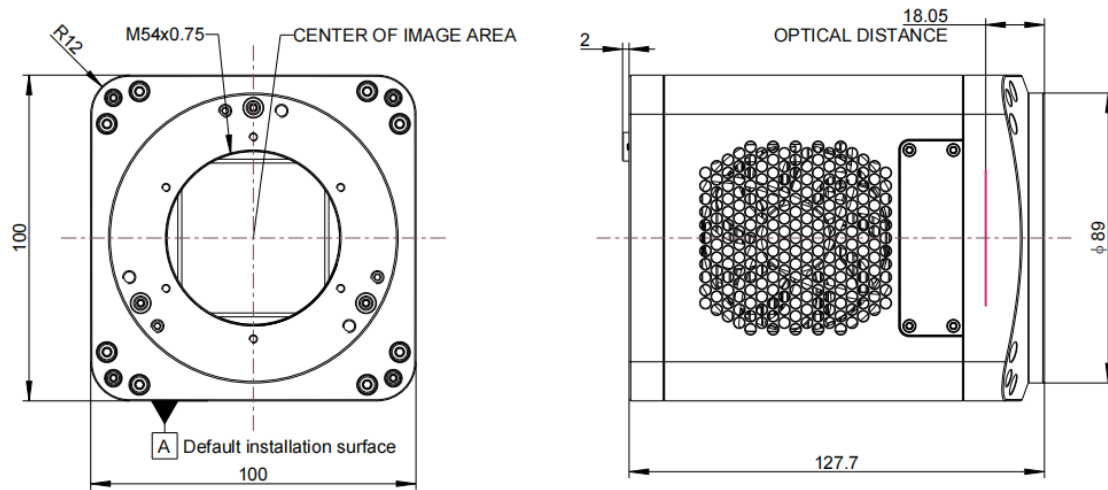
MaxCam-4040FI-TE & MaxCam-4040UV-TE dimensions (mm)
